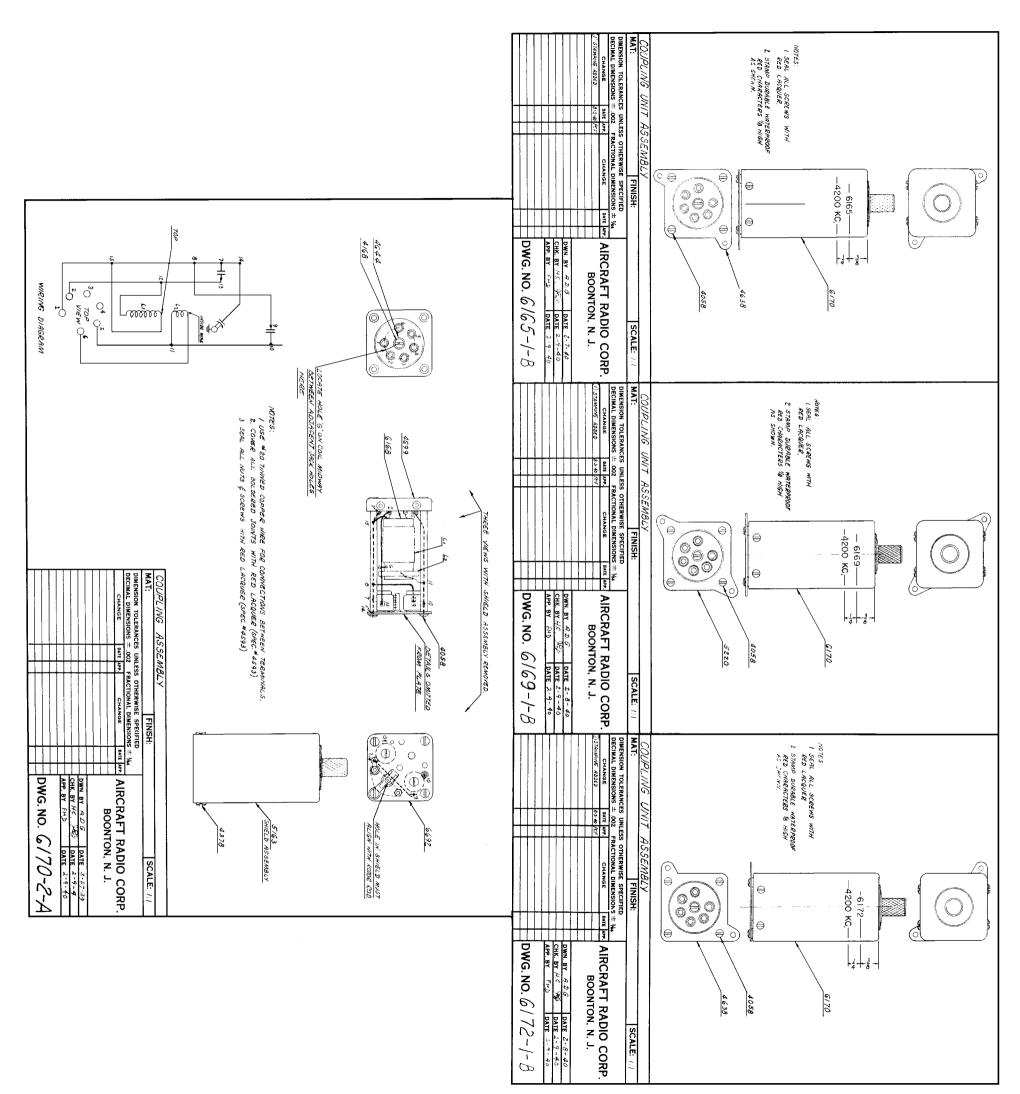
IF Coupling Unit Assemblies 6165, 6169, 6172, with Wiring Diagram
